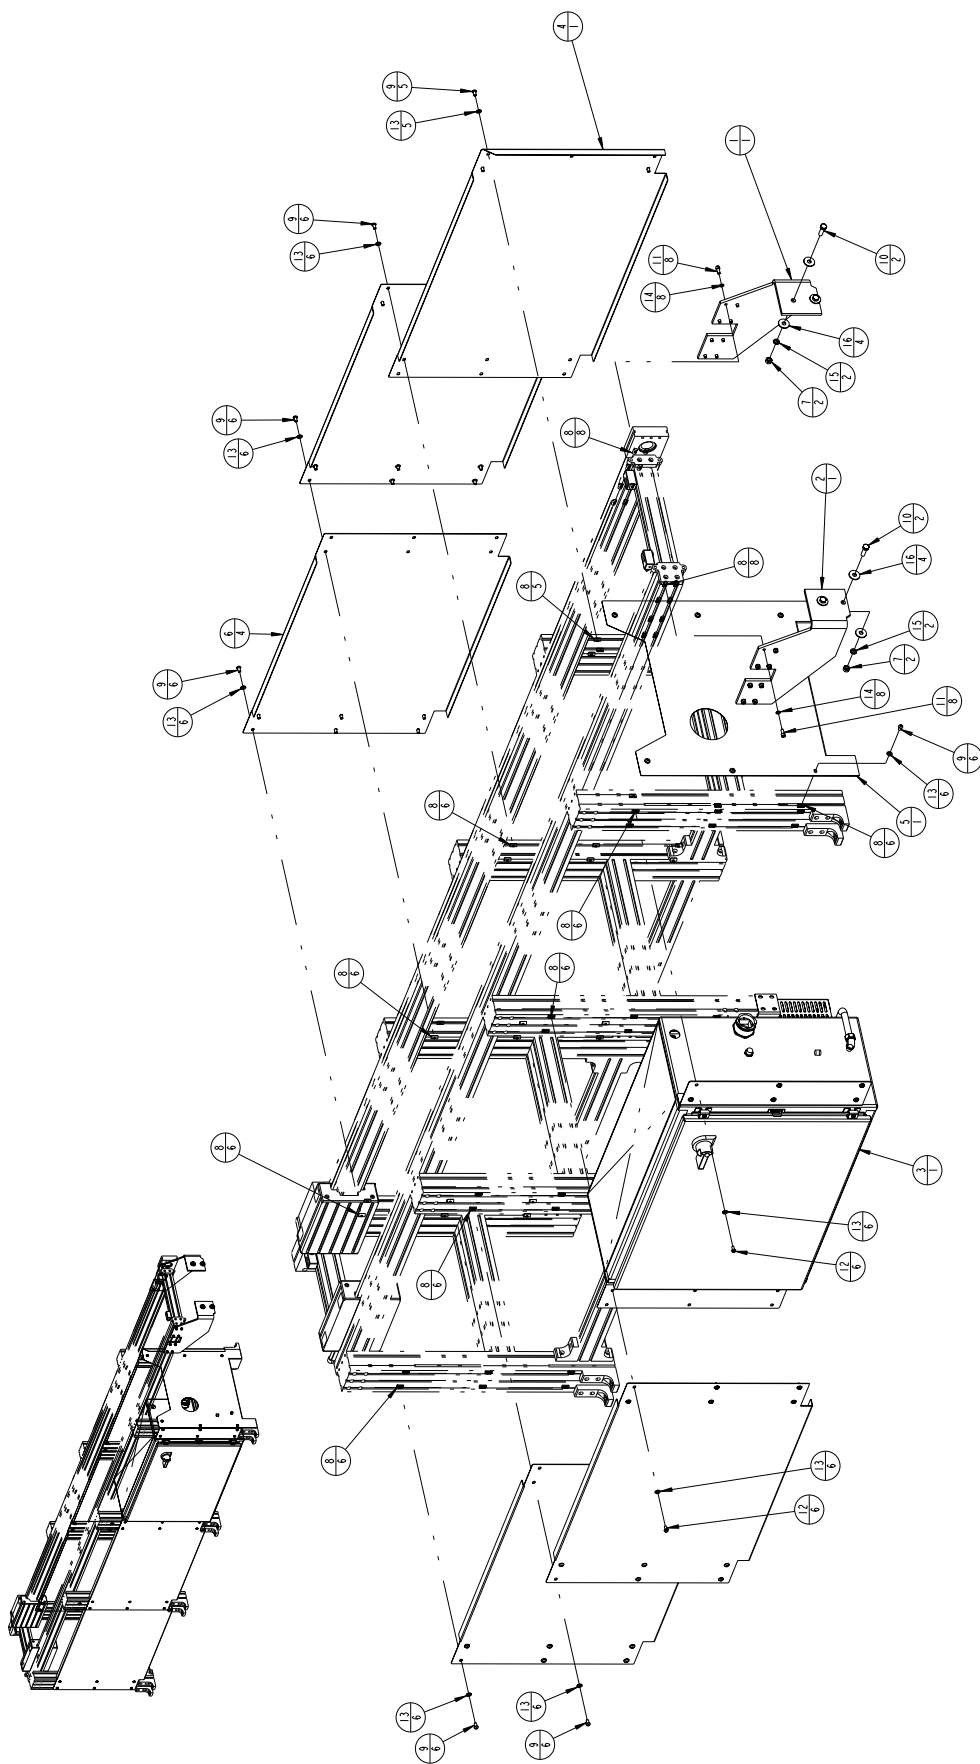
E – 4 METER CARRIAGE BASE ASSEMBLY (1 of 3)
